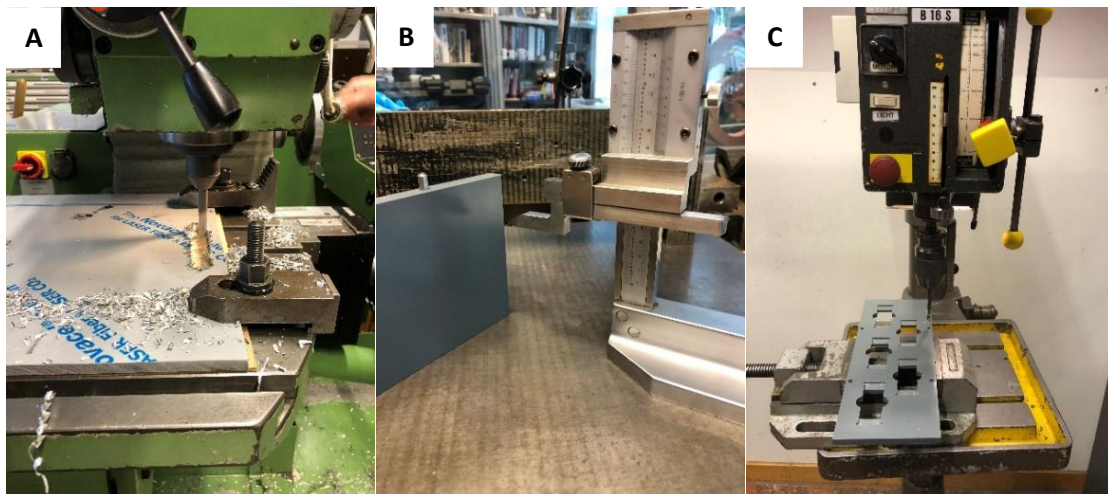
Most of production techniques were used in the fabrication process of the holder. (A) A milling machine was used to manufacture the parts with precise dimensions and features. (B) A drawing pencil was used to mark the correct drilling and spots for assembling the components. (C) A drilling machine was employed to create holes with the exact diameter.
